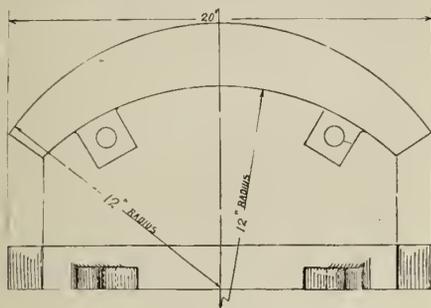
PARTICULARS OF FORMER BLOCK TO BE MOULDED.
